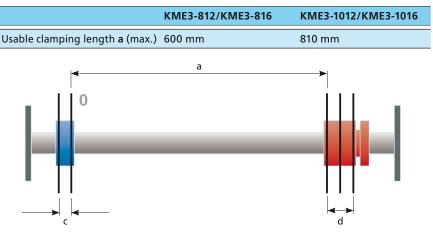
Movable saw configuration with one fixed and one movable saw bush
